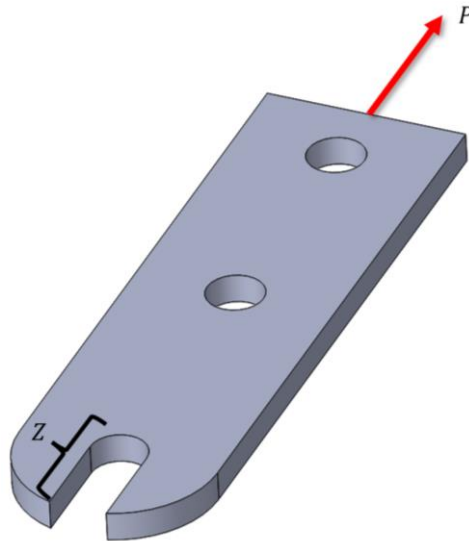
Failure in the gusset plate due to tear out.
